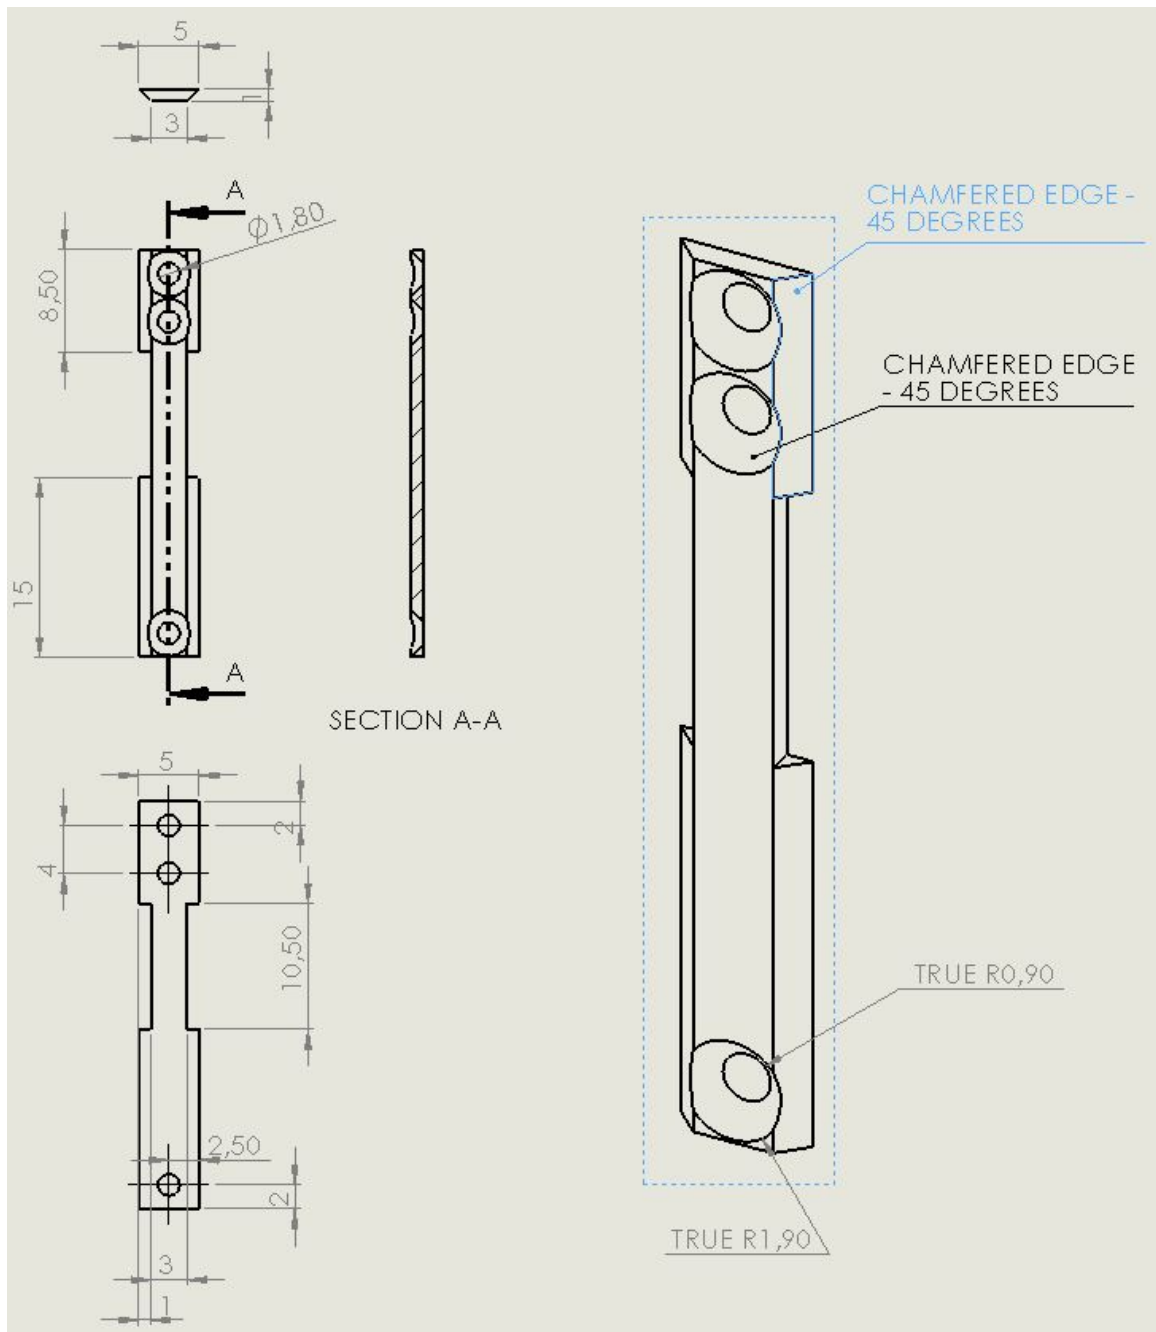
Solidworks model drawing of the central (in relation to the incoming beam) inner frame bar of the cryostat holder
